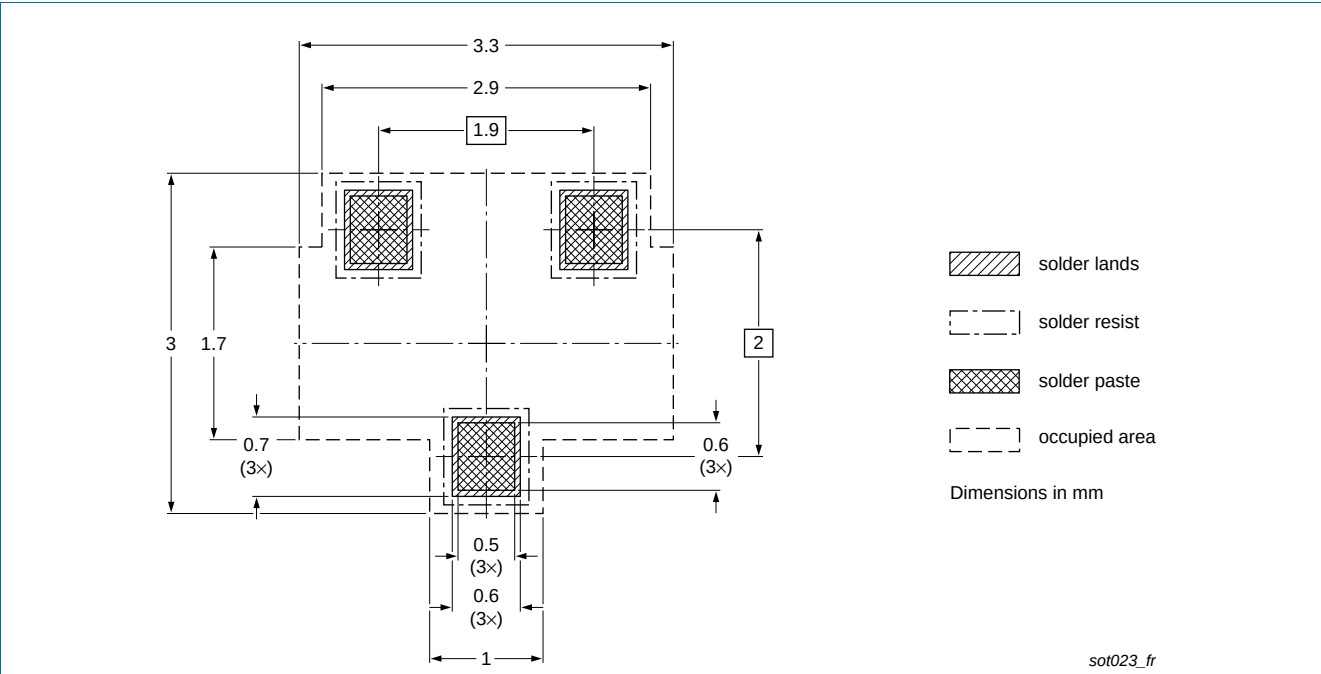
Reflow soldering footprint for SOT23 (TO-236AB)
